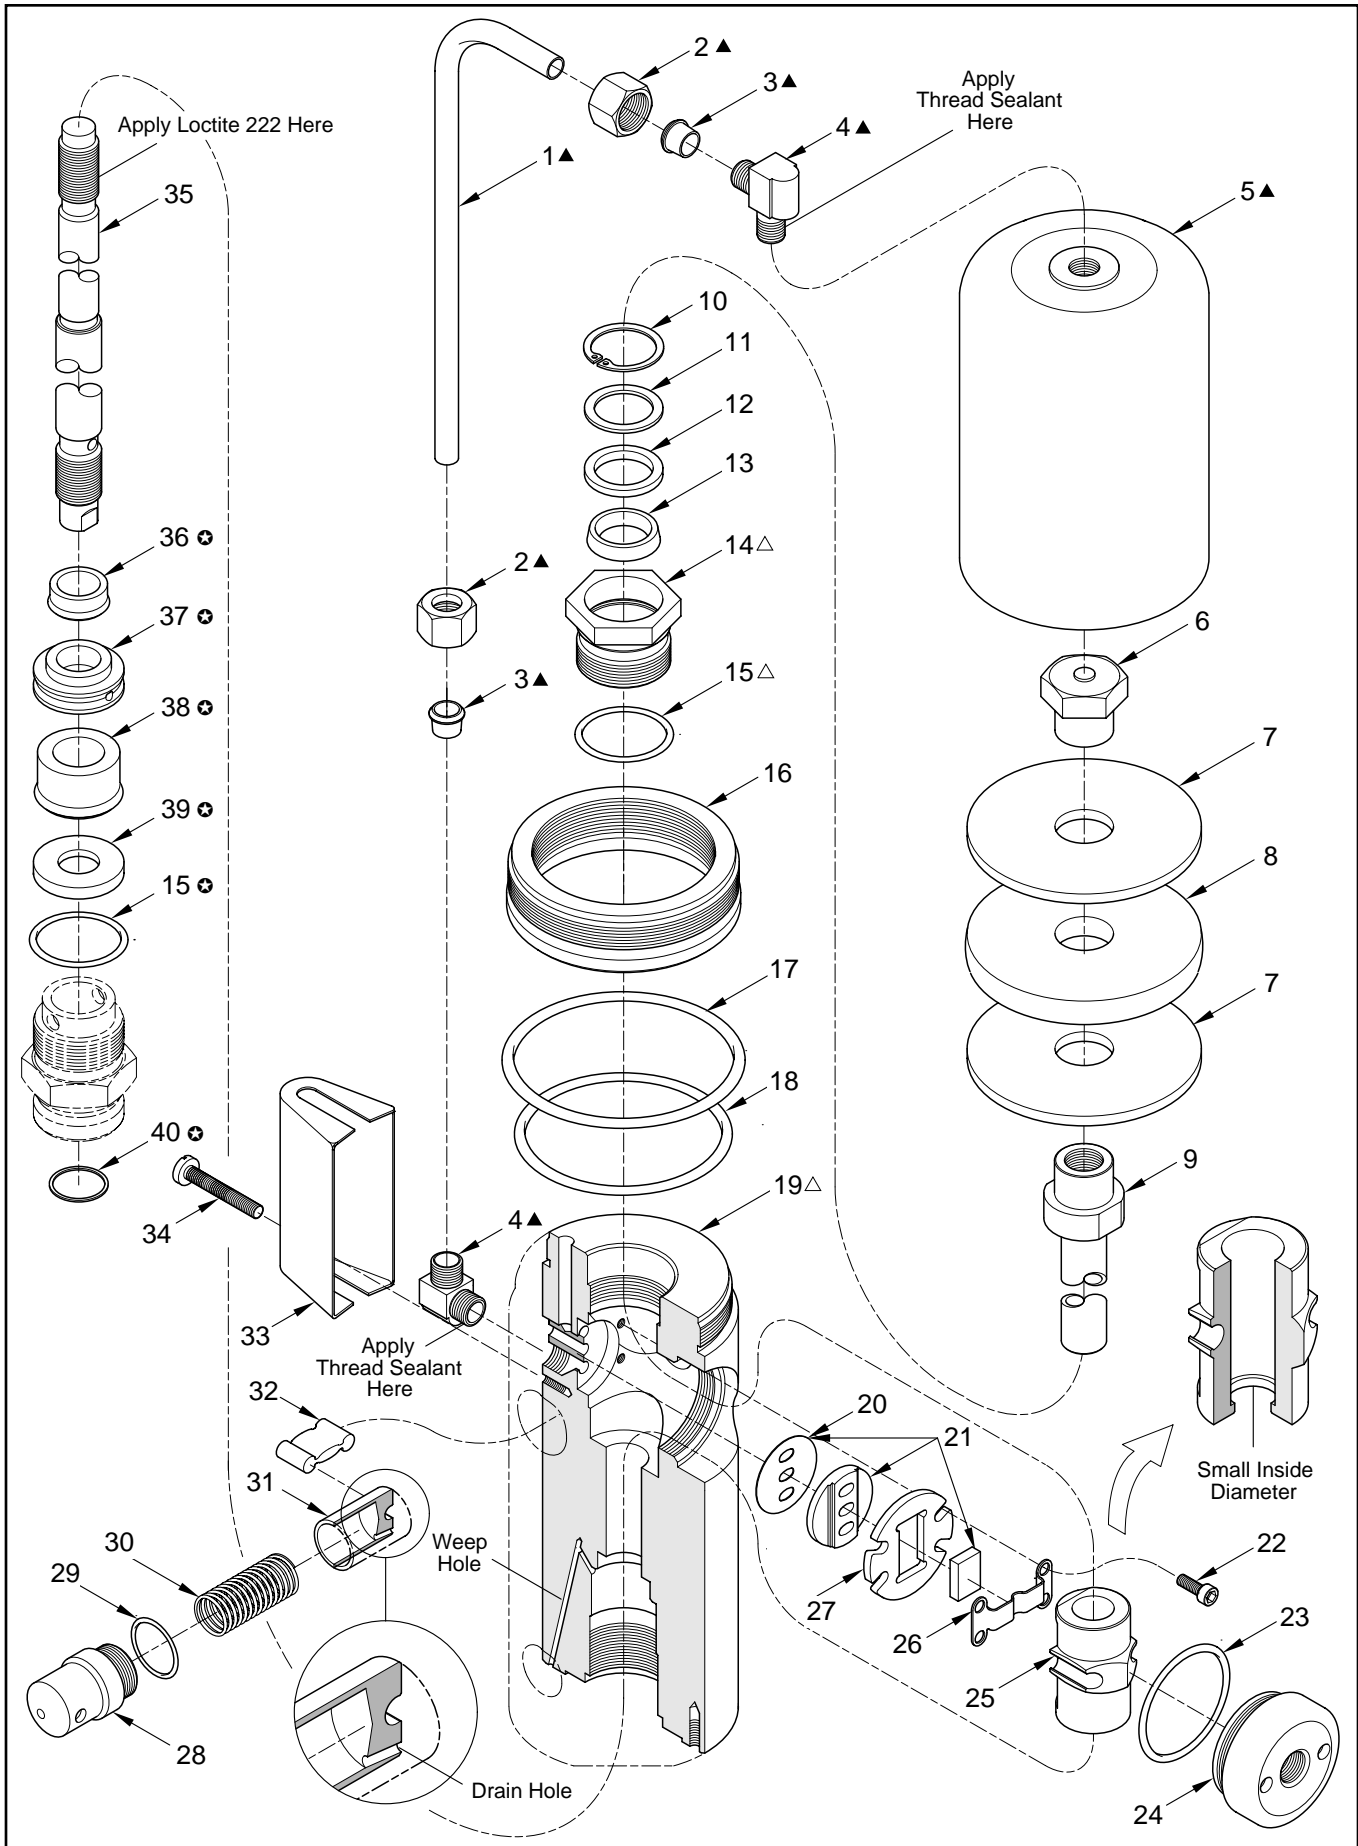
Air Motor Model 324400-5 (with High-Pressure Pump Tube Adapter) - Exploded View
